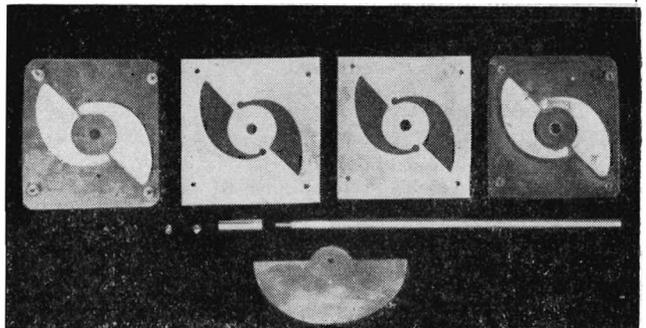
Exploded view of the 0.02 to 0.5pF coupling capacitor
